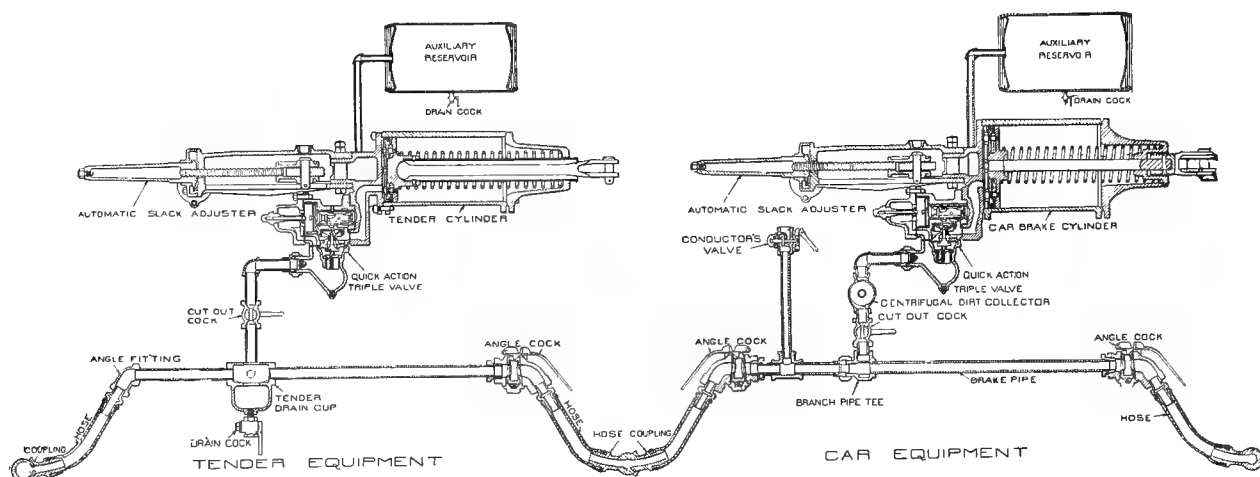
Diagram of Westinghouse Old Standard Quick Action Air Brake Apparatus for Passenger Train Cars.
